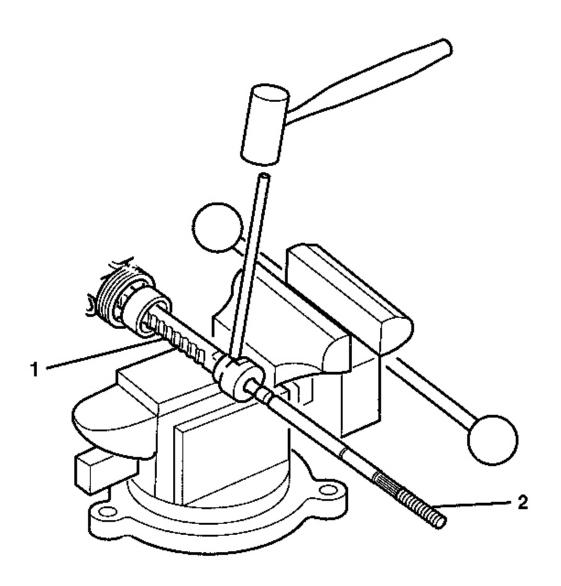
Staking Both Sides Of Female Inner Tie Rod Assembly Housing To The Male Rack
